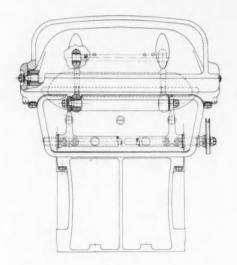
Photograph of Holley airscoop showing heater-valve
